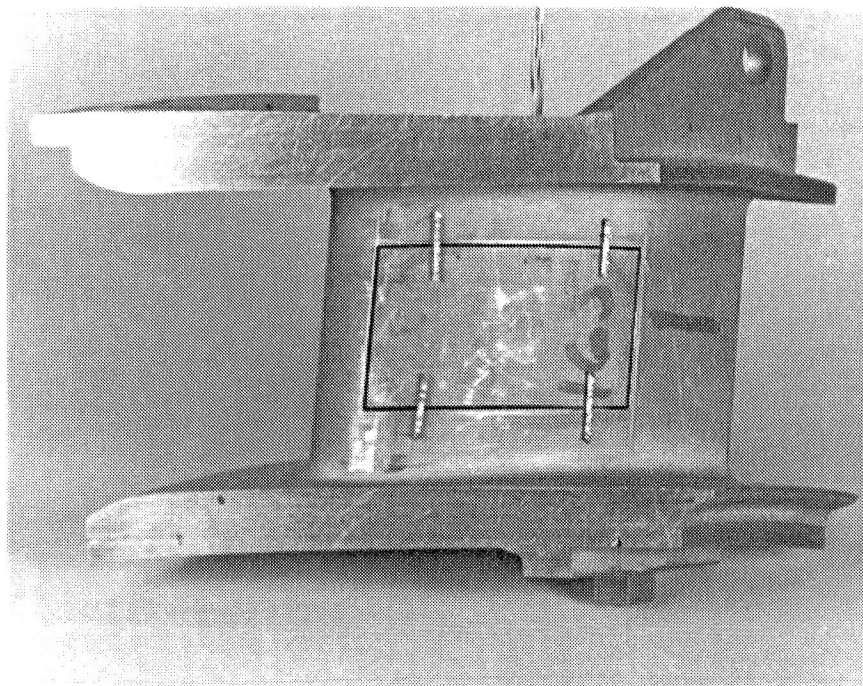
Vane with Window that was Removed for Instrumentation Held in Place by Tackwelded Strip for Rewelding into Vane
